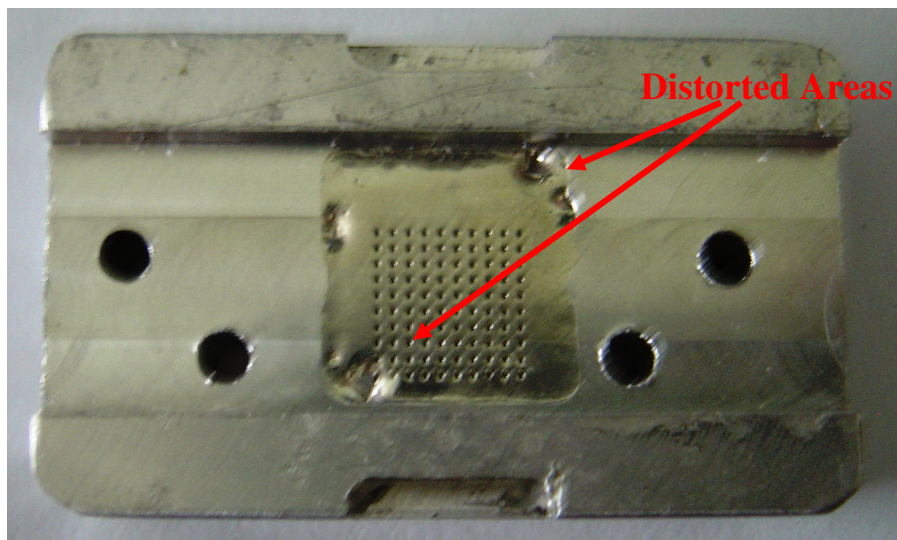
Lead alloy mold with distorted surface after injection molding.
